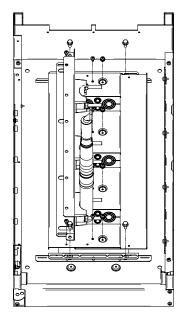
Installation of the floor plates, cable guide splines, cable clamps and fairleads
